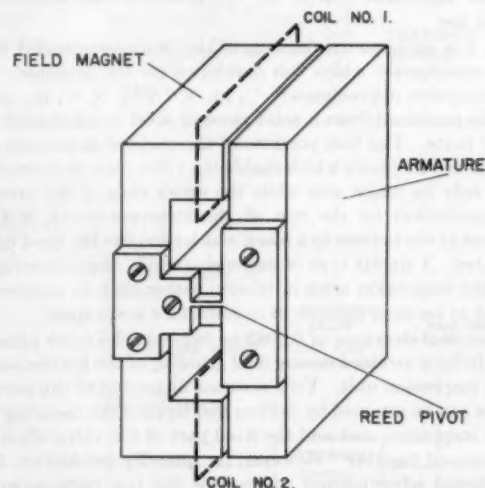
ISOMETRIC DRAWING OF ELECTROMECHANICAL TORQUE MOTOR
